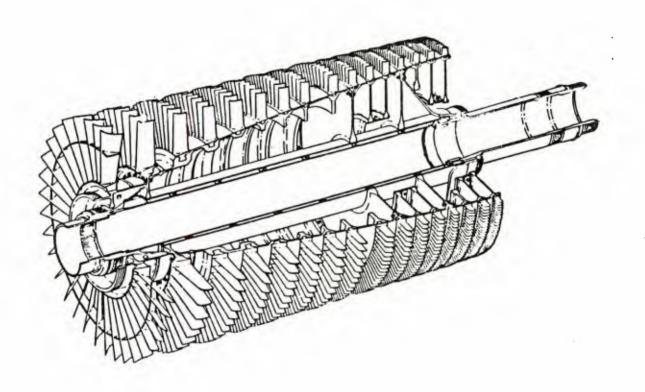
Compressor rotor of a CF6-6 engine (courtesy of General Electric Company).
